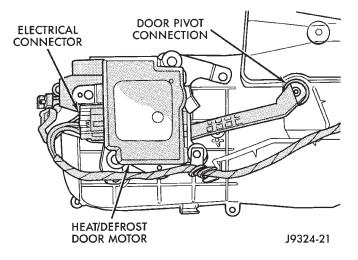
Heat/Defrost - Panel/Defrost DoorMotor
